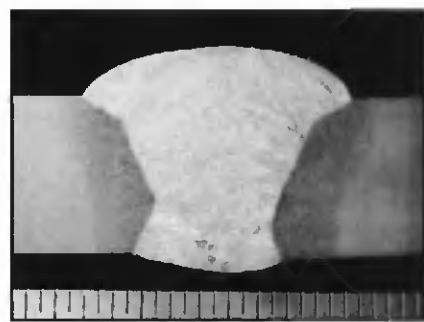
A cross section of the root weld deposited at RO = 9.5 mm and 900 A. Note incomplete fusion on the right sidewall.
